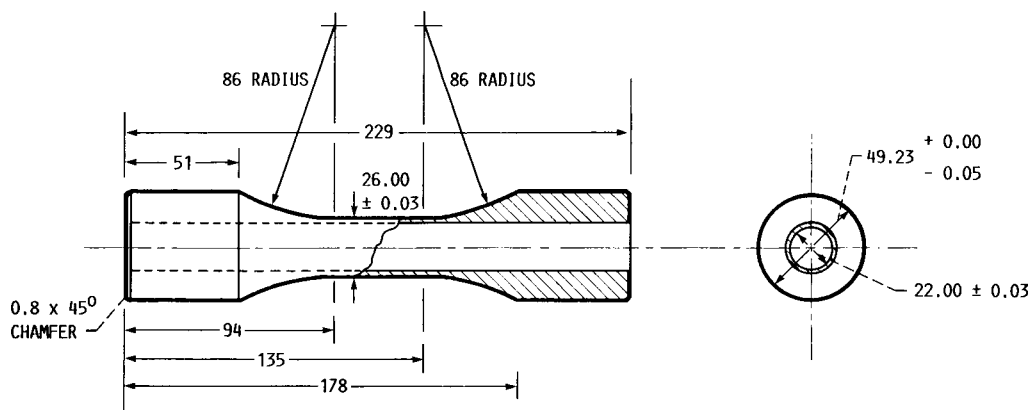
TUBULAR AXIAL-TORSIONAL FATIGUE SPECIMEN. ALL DIMENSIONS ARE GIVEN IN MILLIMETERS.
